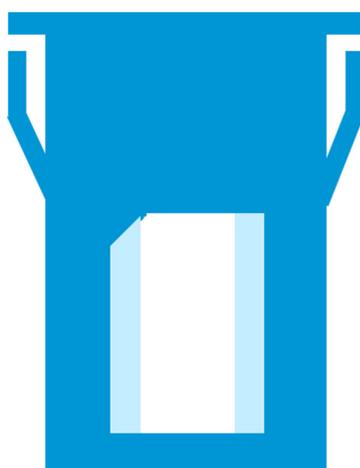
This is a sample drawing of a “Single Insertion Lock” SIM tray design, where once installed the SIM will lock itself into the unit.
